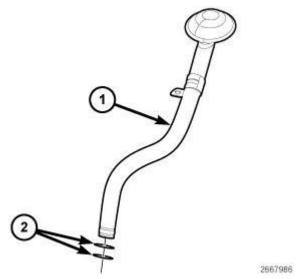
Oil Pickup Tube & O-Rings Courtesy of CHRYSLER LLC
